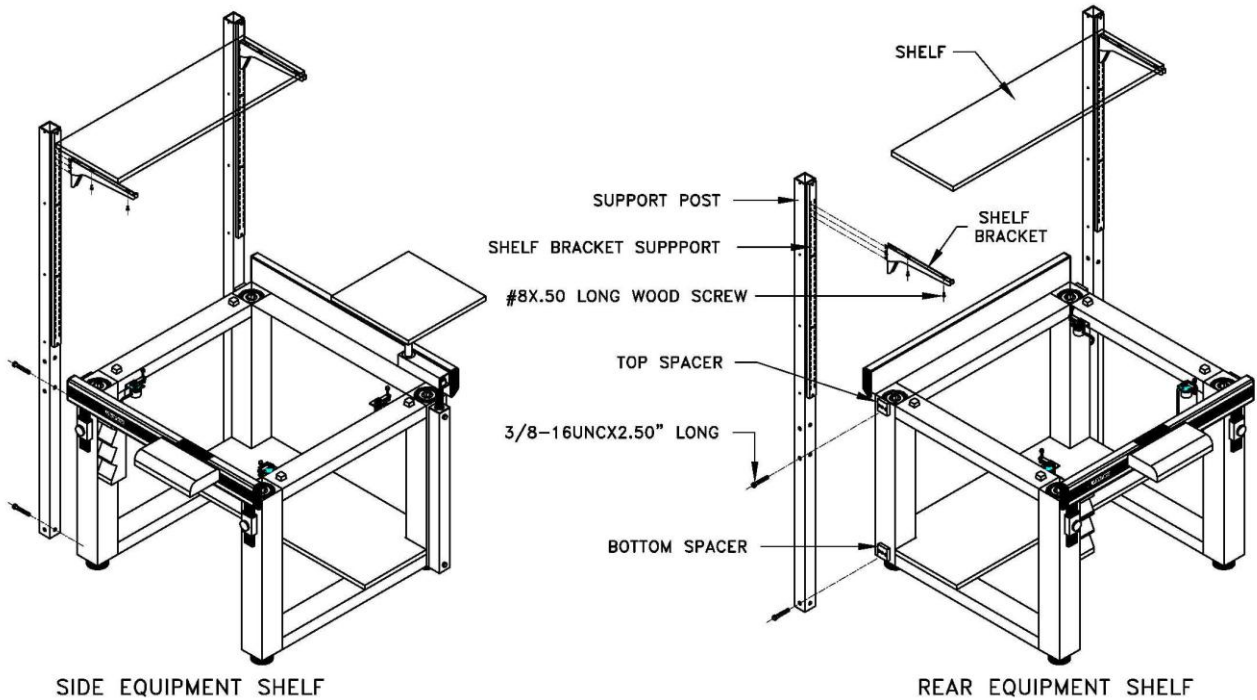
Optional Rear and Side Overhead Equipment Shelf Assembly.
